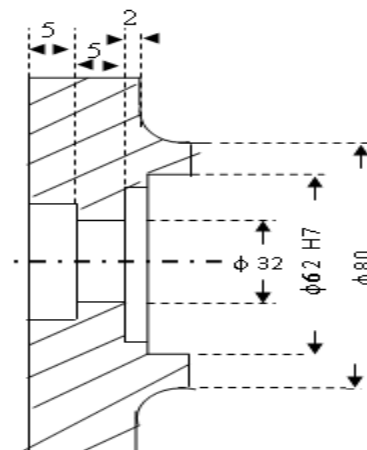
Bracket with shaft seating arrangement and its dimensions
